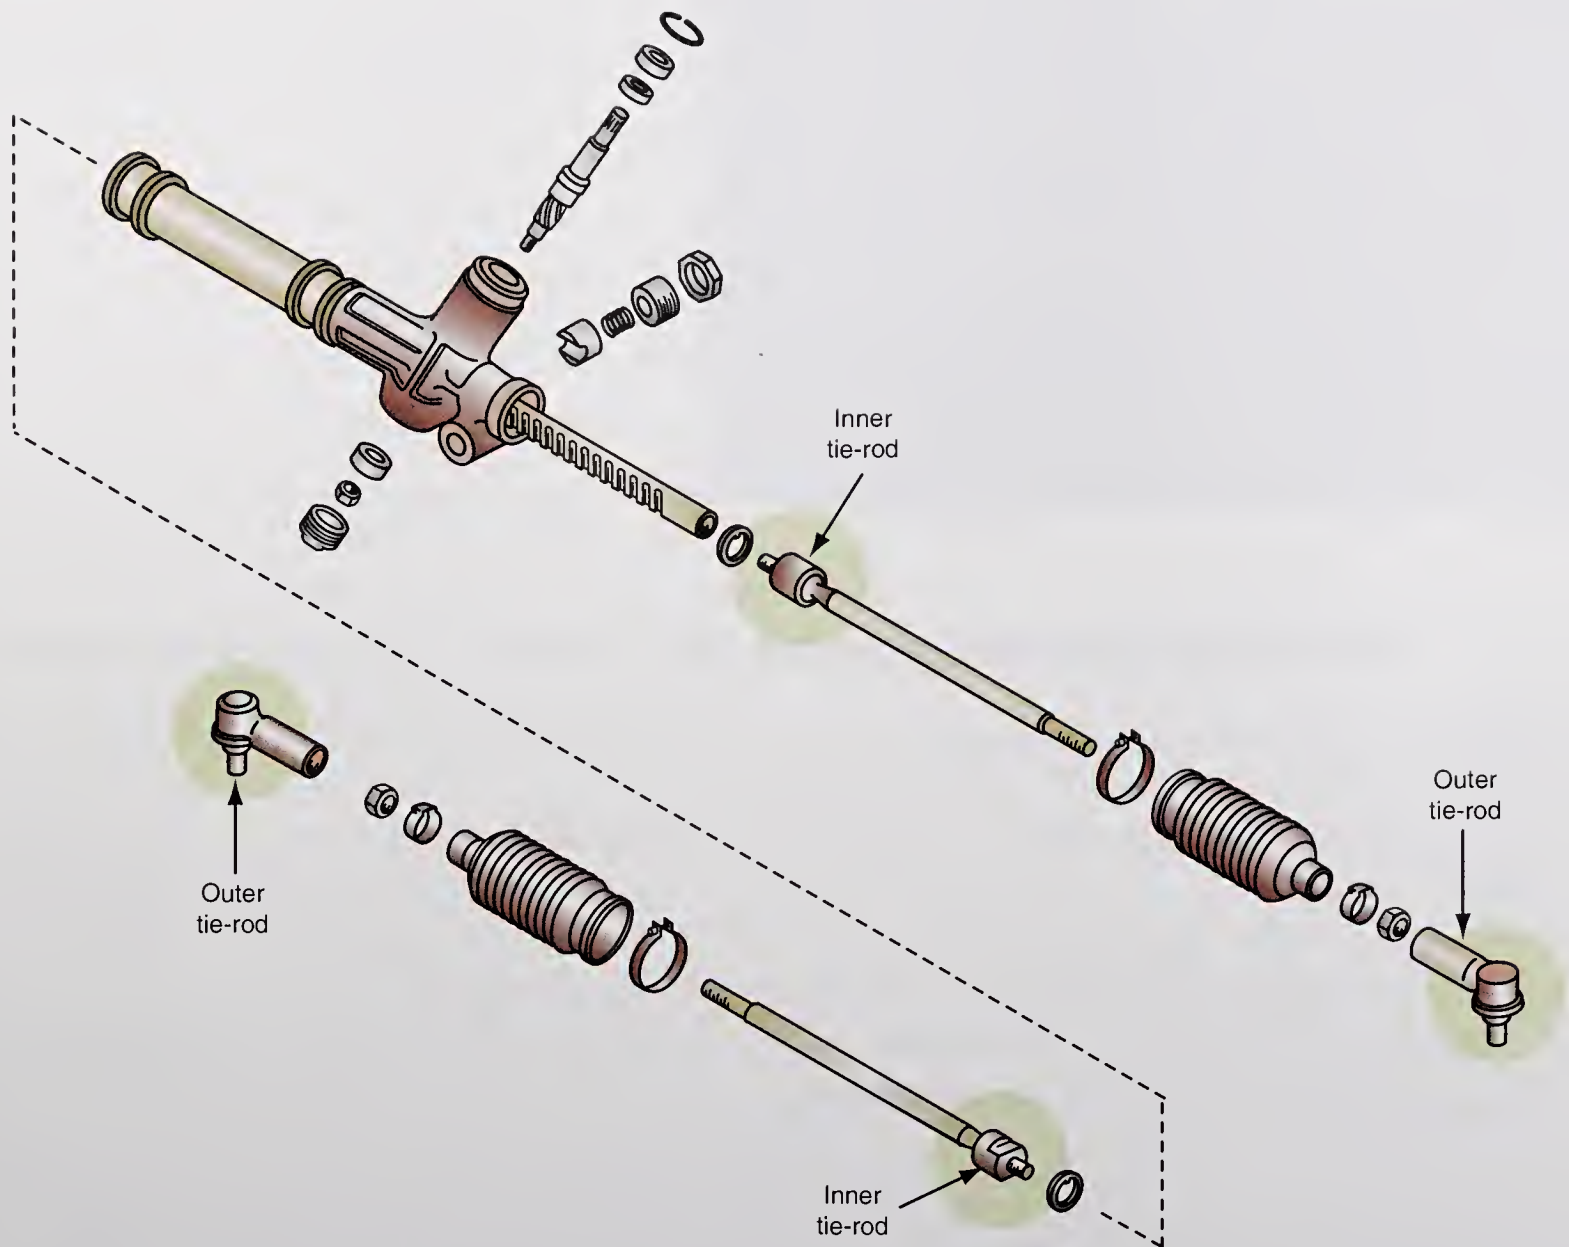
Wear points at the inner and outer tie-rod ends in a rack and pinion steering gear.
